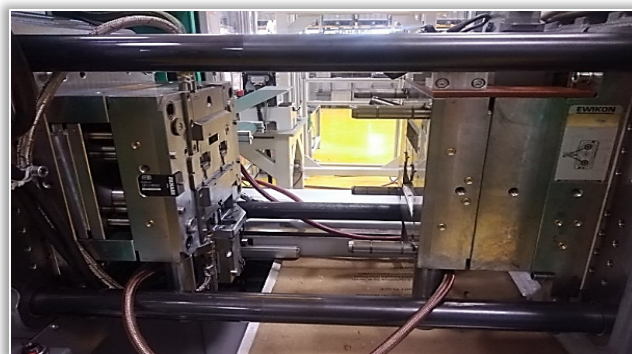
Plates on which the tool is mounted (secured), EWIKON machine
